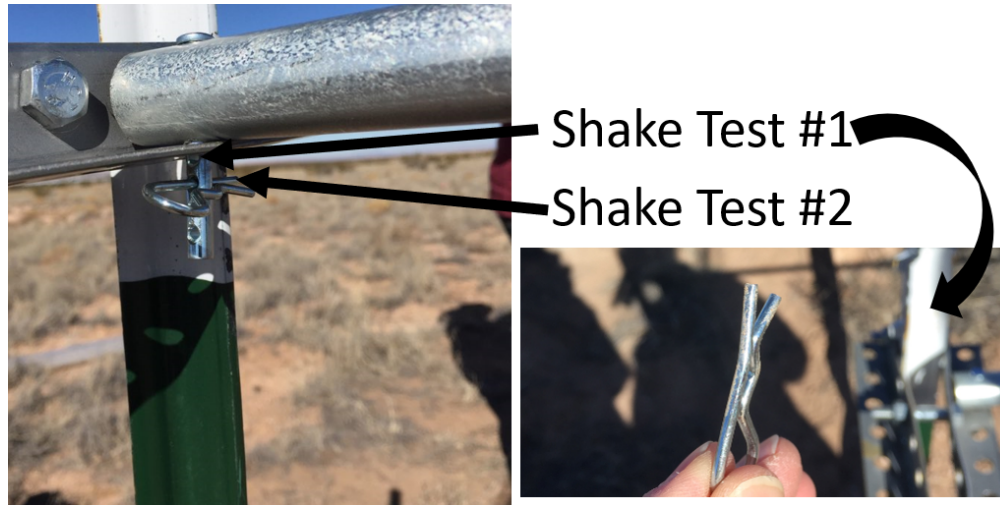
shake test 1 led to overstress of the pin thread and caused it to bend slightly (right); shake test 2 seemed to avoid this problem
